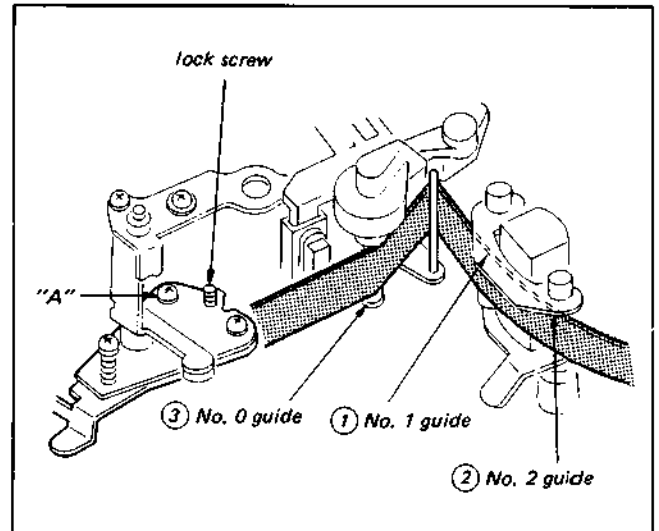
Replacement and adjustment (2) of tension regulator arm plate assembly
